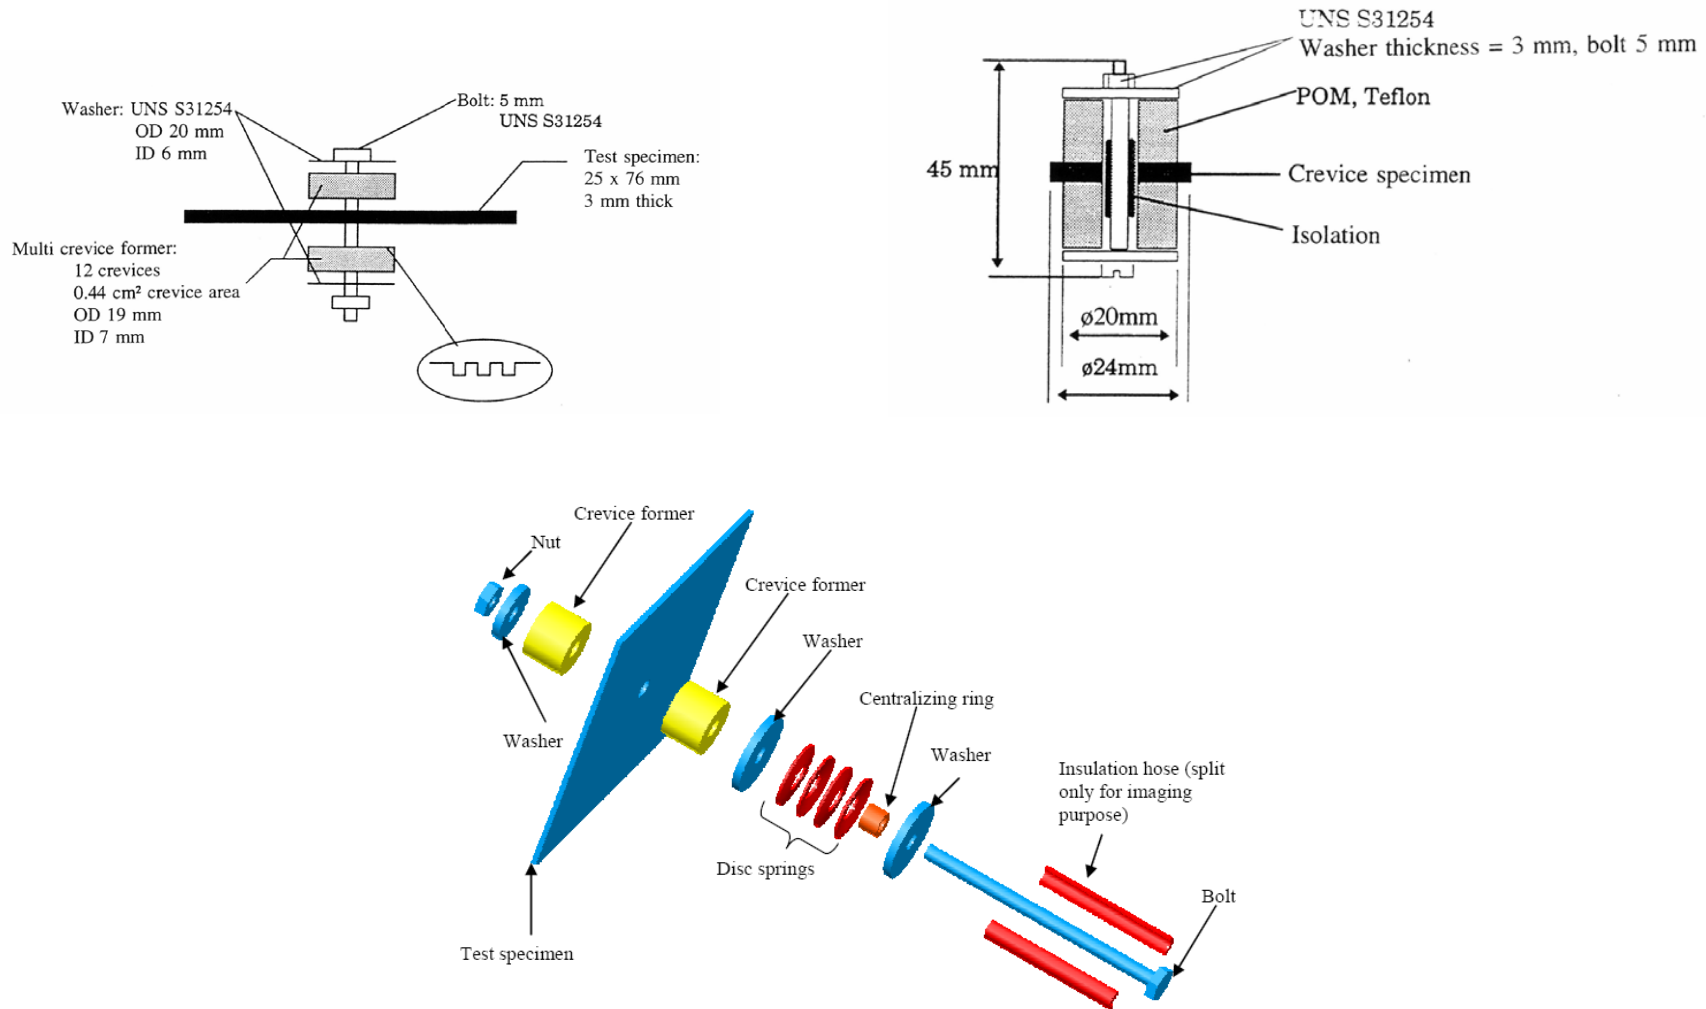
Crevice corrosion assembly developed during the CREVCORR project /8, 9/.
